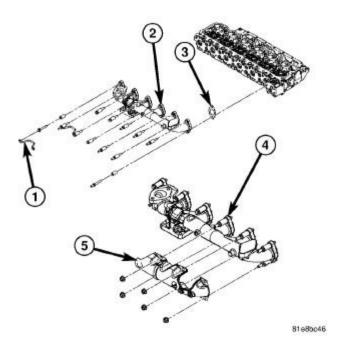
Exhaust Manifold, Gasket, Heat Shield, Retainer & Bolts Courtesy of CHRYSLER GROUP, LLC
